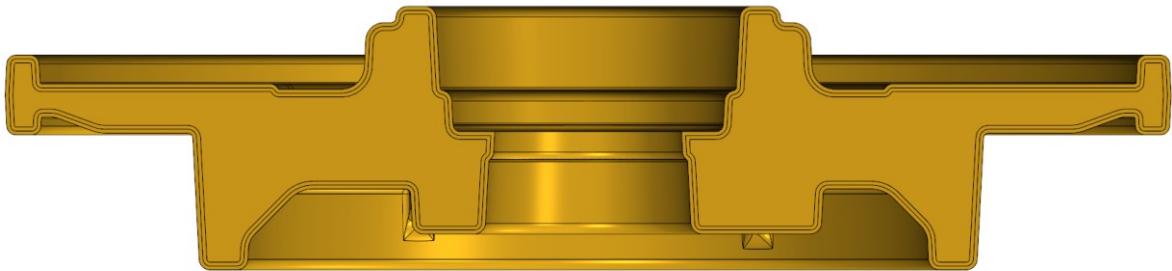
Uniform surface profile tolerance for the whole traction sheave.
